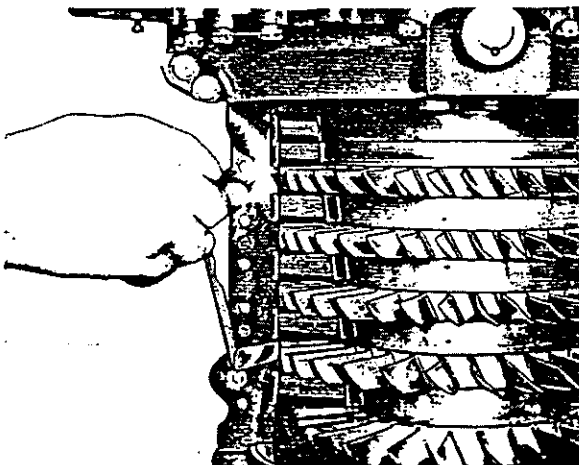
A. Checking Compressor Rotor Blade Tip Clearance
